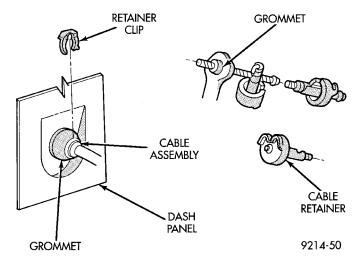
Accelerator Pedal and Throttle Cable—Rear View
